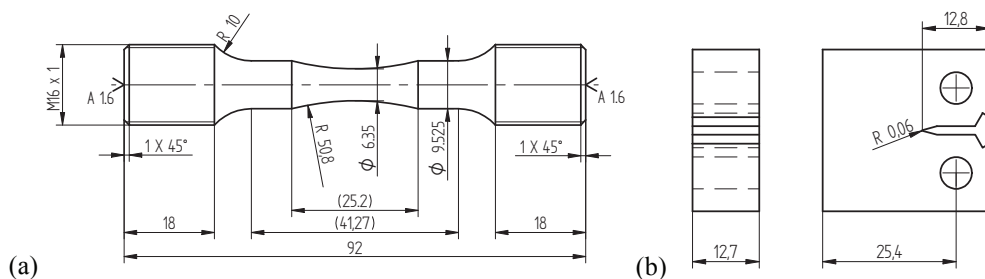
Shape and dimensions of: (a) unnotched specimens employed for uniaxial fatigue testing; (b) fatigue crack propagation testing.
